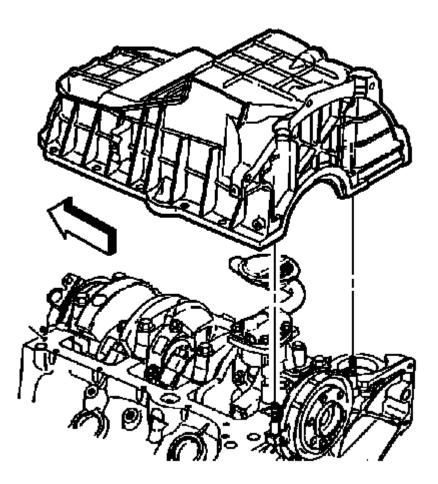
View Of Oil Pan Courtesy of GENERAL MOTORS CORP.
